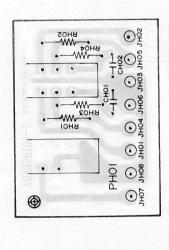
Muting Hi Filter Assembly(PH01 Component Locations
